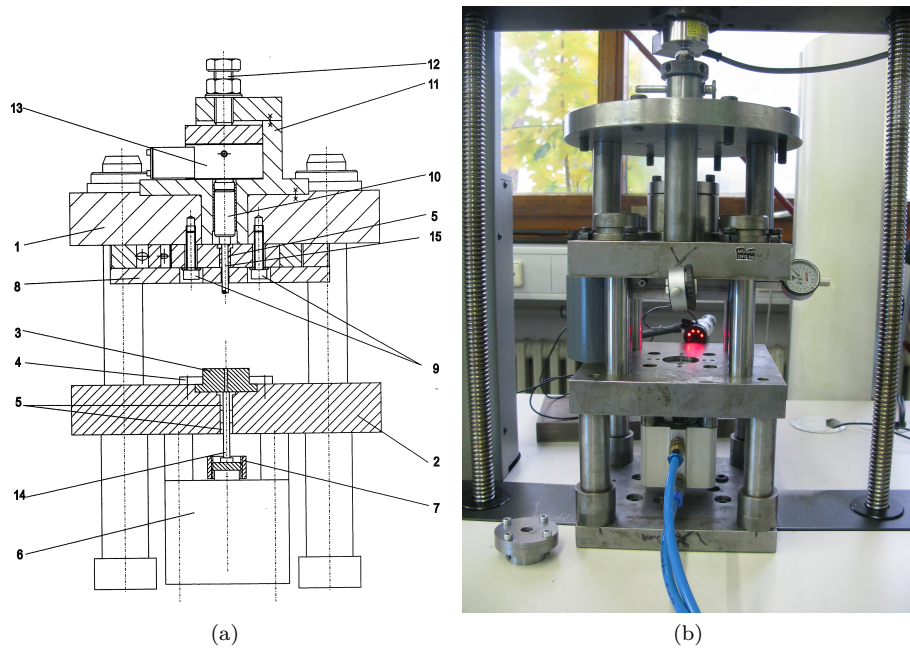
Sectional sketch of the die set utilized for the micro DCE-test (a) and a photograph of the tool system mounted on the general purpose testing machine (b).
